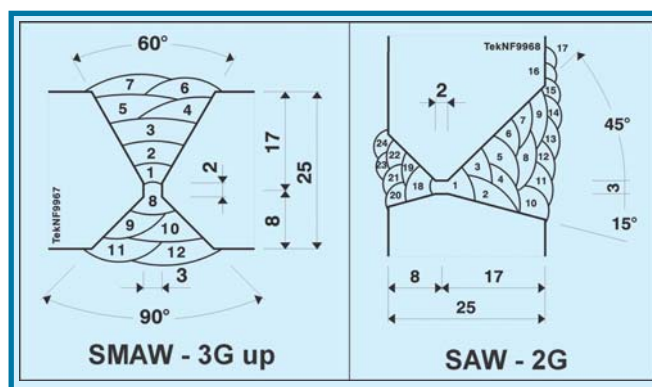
Weld preparation in 9% Ni steel for welding with stick electrodes (SMAW) in 3G vertical up position and for submerged arc welding (SAW) in the 2G horizontal-vertical position.
